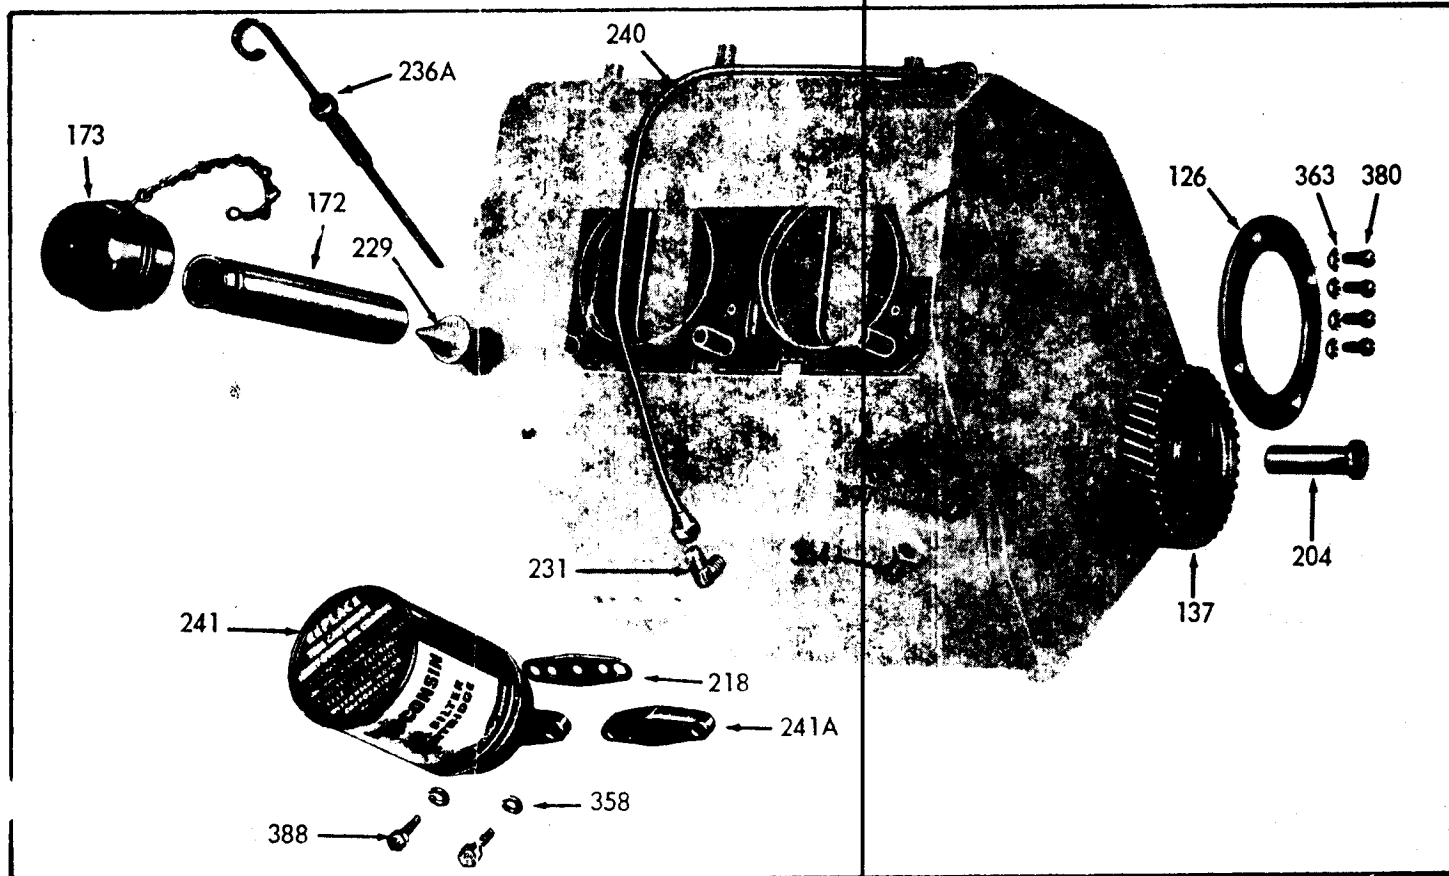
, OIL FILTER AND OIL FILLER MOUNTING GROUP
